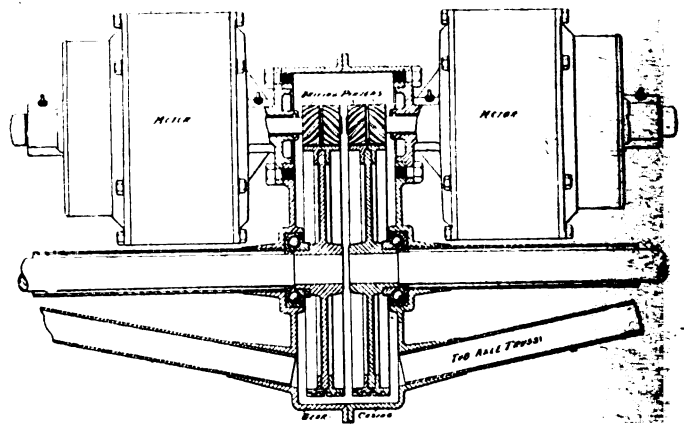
Rear Axle of Waverley Electric Car, showing Double Motor Drive.
